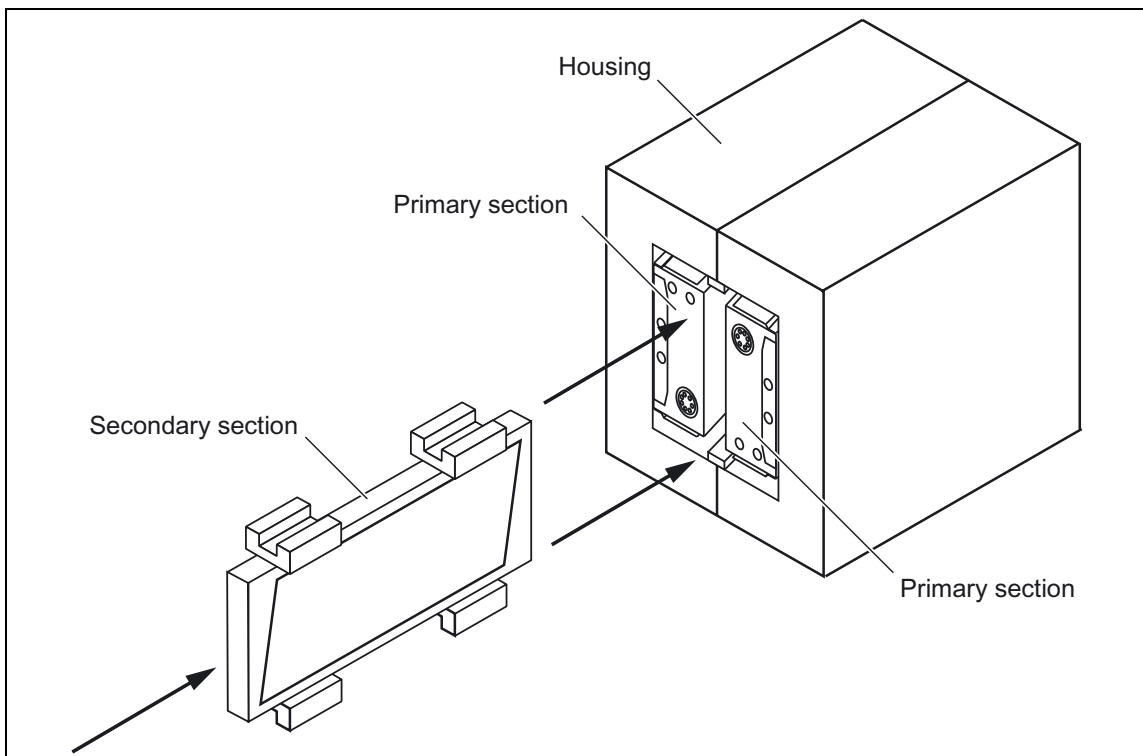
Insertion of the secondary section in the case of a double-sided motor
